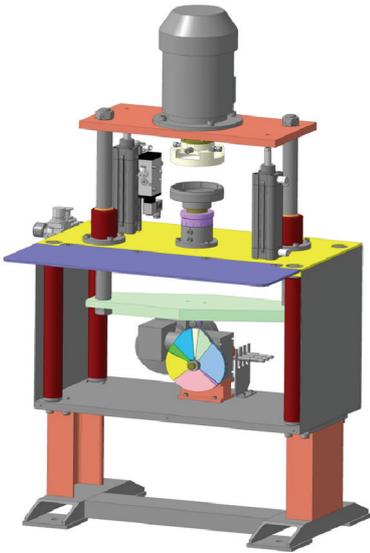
3D view of the technological complex model for friction welding
